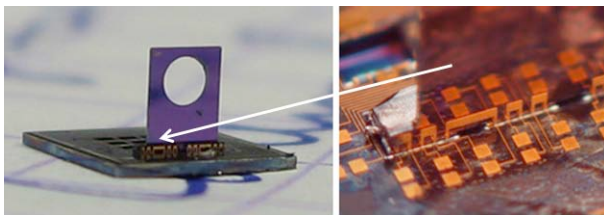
Picture of the out-of-plane assembled structure (left). Macroscopic picture of the compressible interconnects (right).
